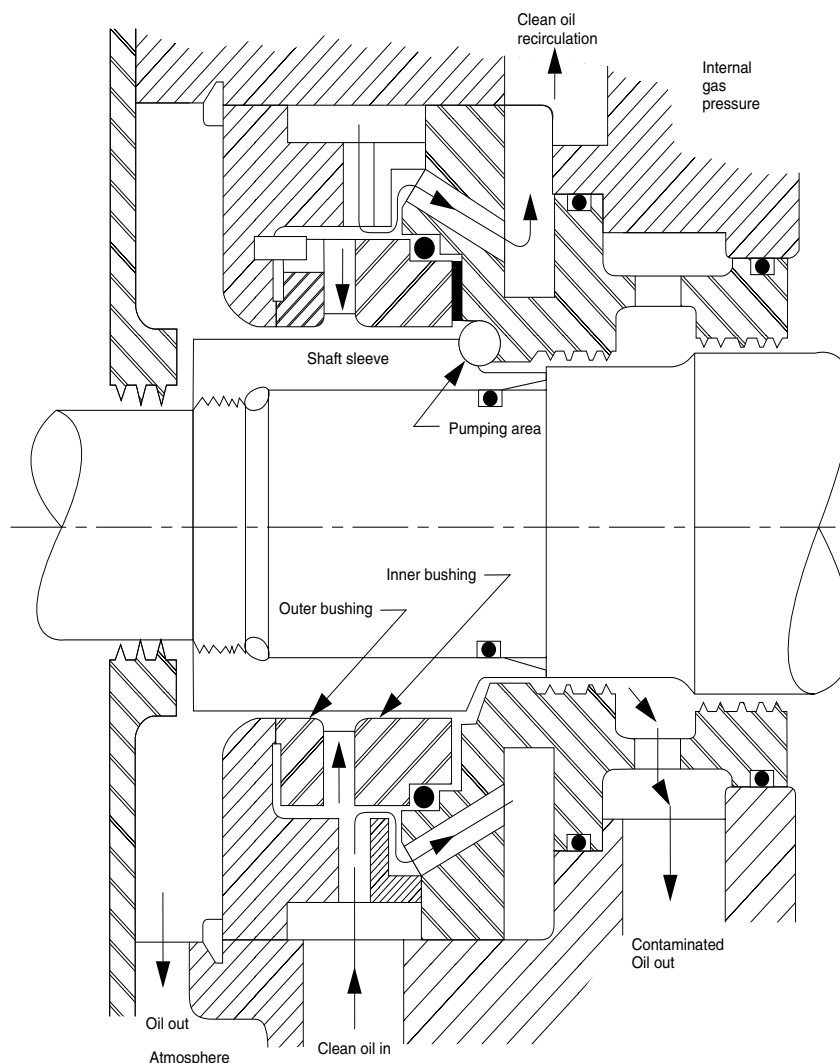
Liquid-film Shaft Seal with Pumping Bushing
